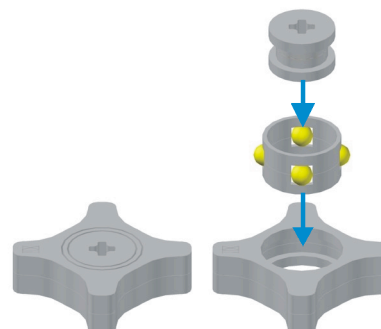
CAD rendering of an assembled bearing with ball cage (left) and exploded diagram showing all of the individual parts (right).
